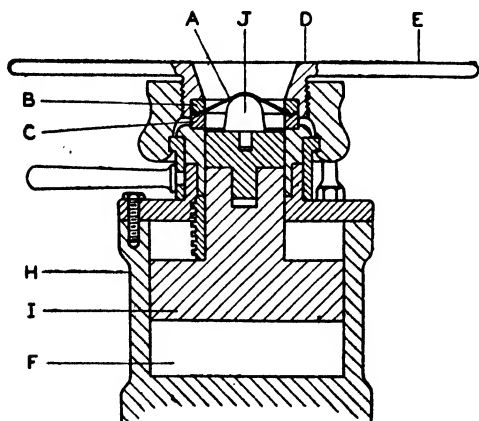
Diagrammatic sectional elevation of Guillery cupping test machine.
